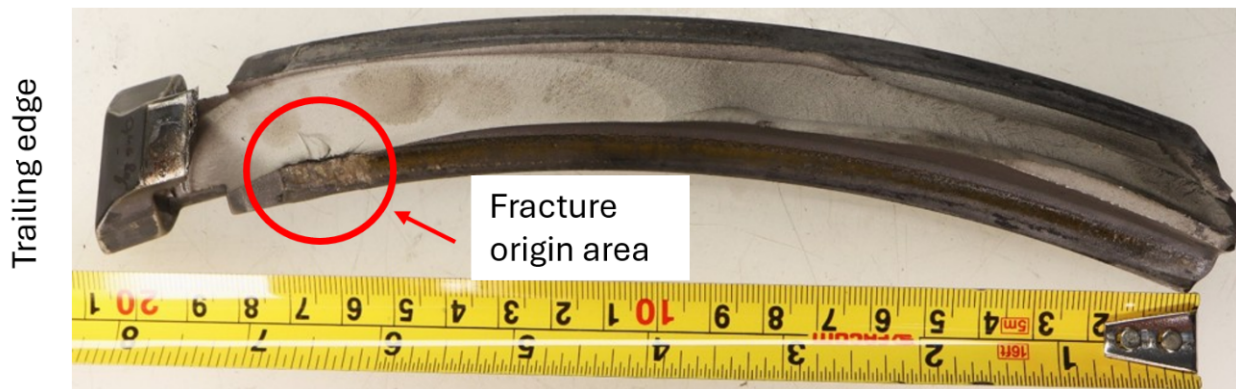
Fracture surface on the No. 10 fan blade dovetail piece (Source Safran Aircraft Engines).
